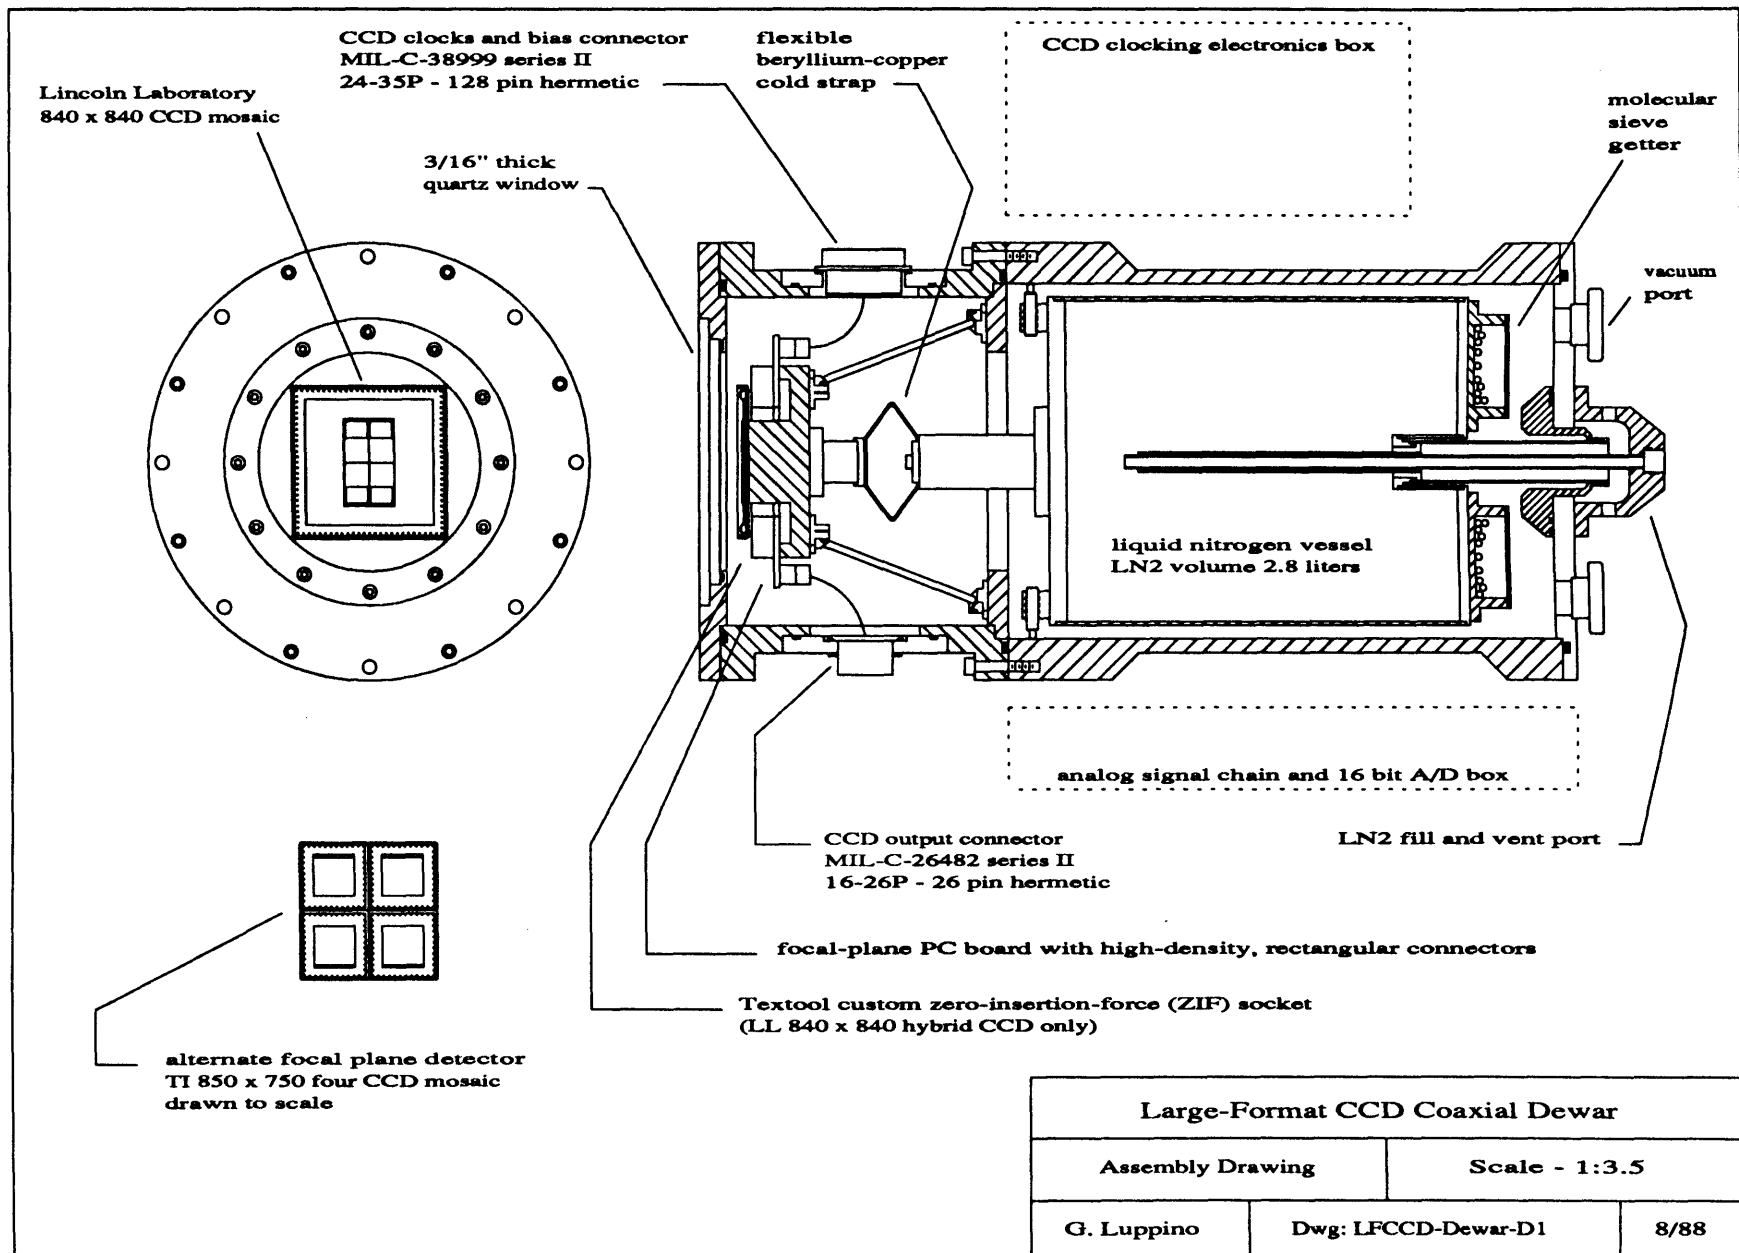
Assembly drawing of large-format CCD coaxial dewar
